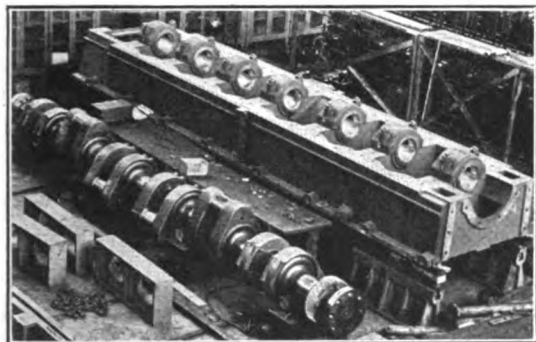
Crankshaft and bedplate fitted with upper and lower bearing caps. The shaft is "built-up" and has a coupling in the centre
